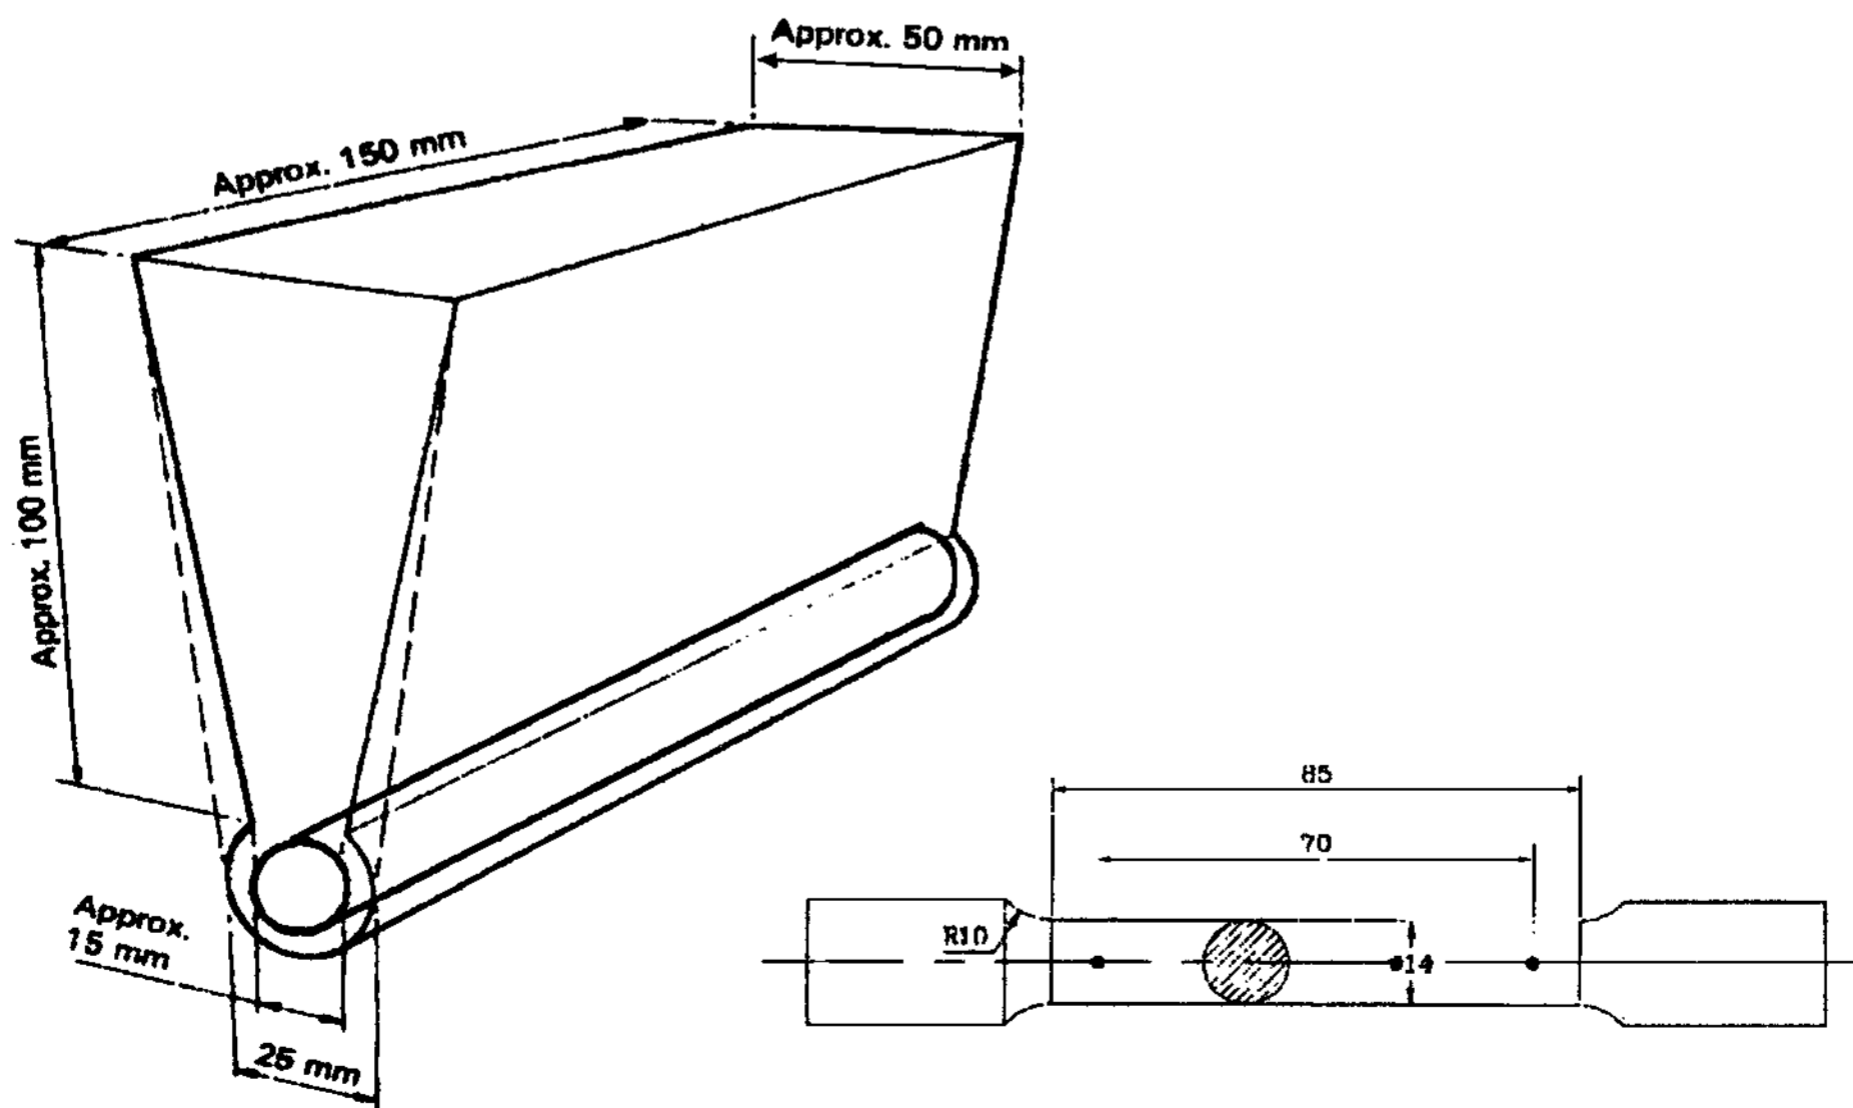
Dimensions of V-shape block mold and sampling location of tensile specimen
